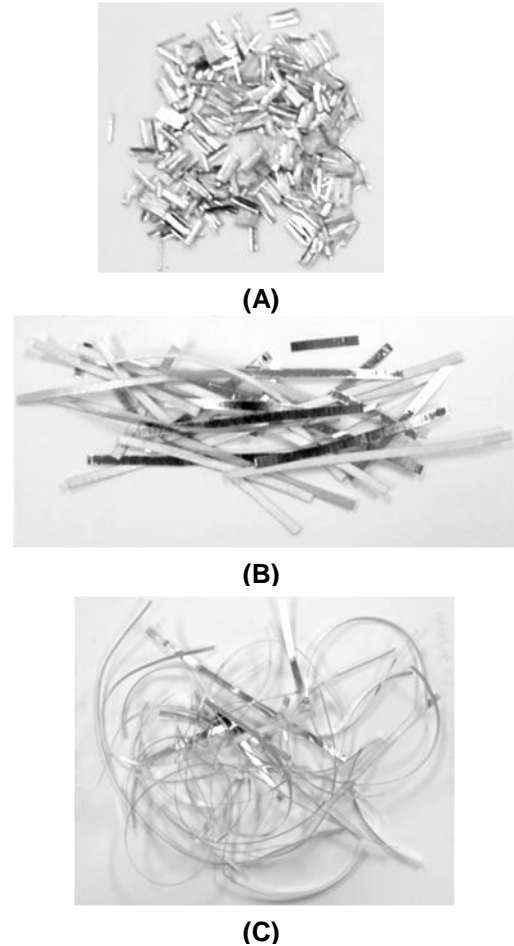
CHIP MORPHOLOGY IN MACHINING AZ31 MAGNESIUM DISCS UNDER: (A) CRYOGENIC MACHINING, CUTTING SPEED = 50 m/min, (B) CRYOGENIC MACHINING, CUTTING SPEED = 100 m/min, (C) CRYOGENIC MACHINING, CUTTING SPEED = 150 m/min.
